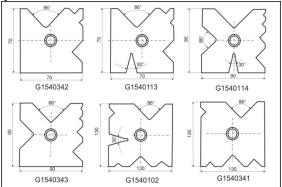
Technological sub-group i.e. lower tool (die) for sheet metal bending
